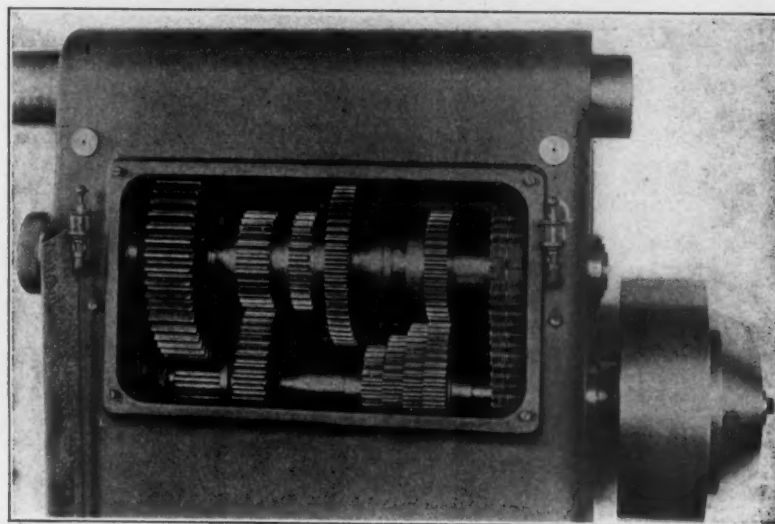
UPPER PART OF COLUMN WITH COVER-PLATE REMOVED SHOWING DRIVING-GEAR TRAIN.
